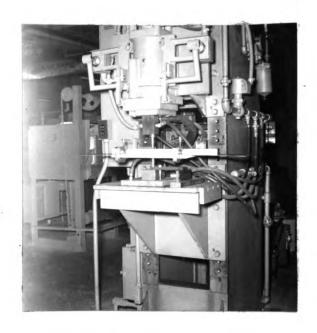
Photograph of sample connection clamped to weld locating fixture and mounted in welding press ready for welding.
